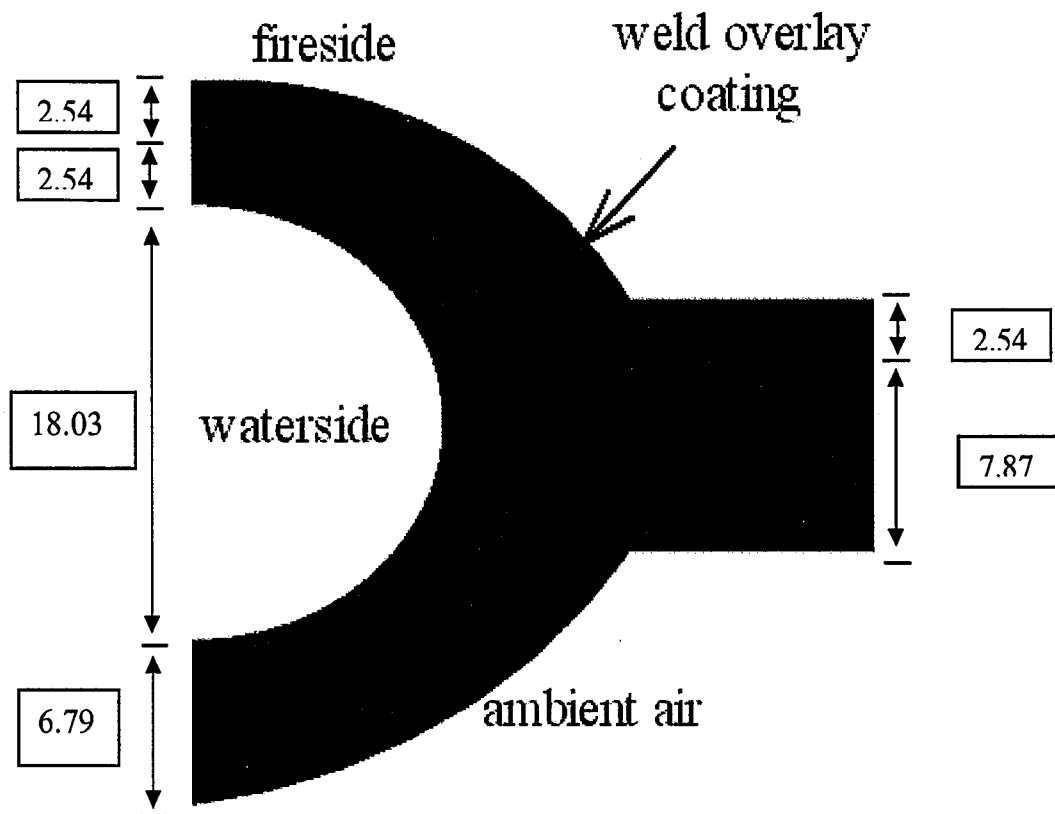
Dimensions of the boiler tube used in the half model (mm)
